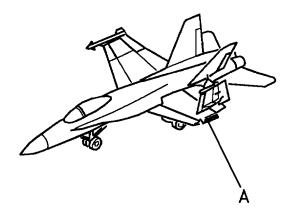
Outer Wing Removal and Installation (Sheet 1)
